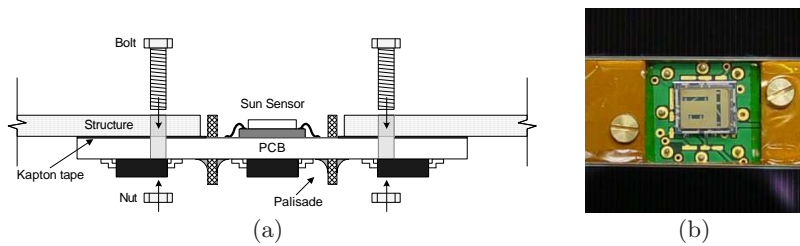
Mechanical integration of the sun sensor PCB. Picture (a) shows how the sensor chip is mounted on the backside of a PCB having view through rectangular holes in the satellite's walls. Picture (b) shows the sensor mounted between the solar cells on DTU sat.
